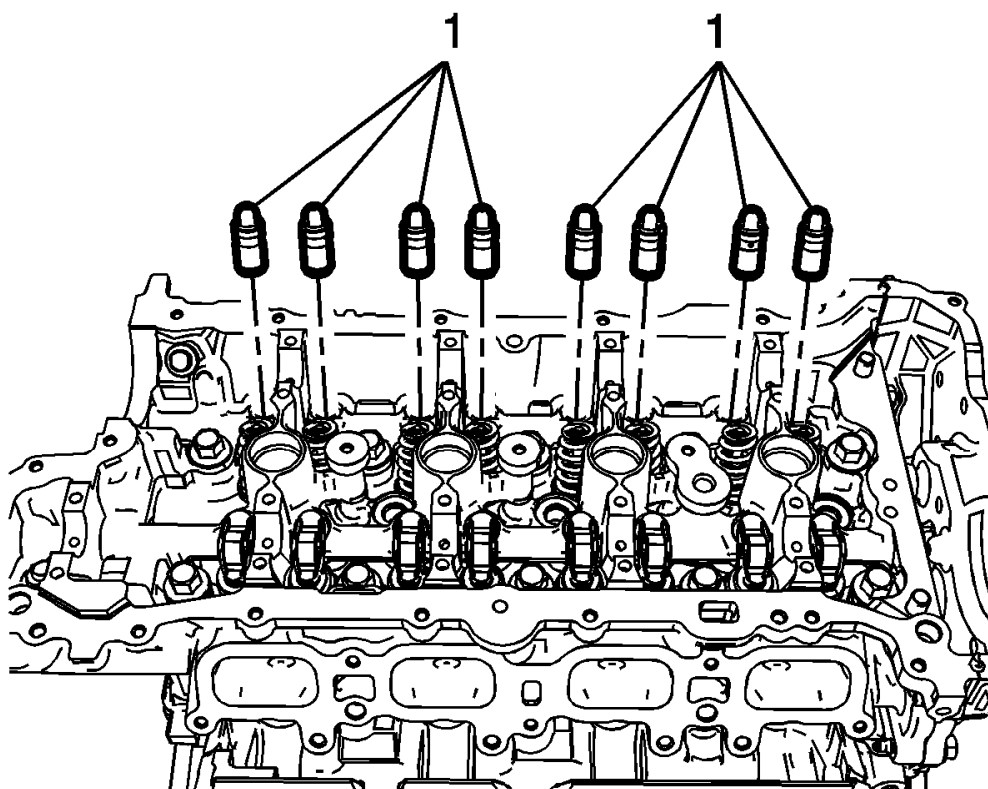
Hydraulic Lash Adjusters - Exhaust
